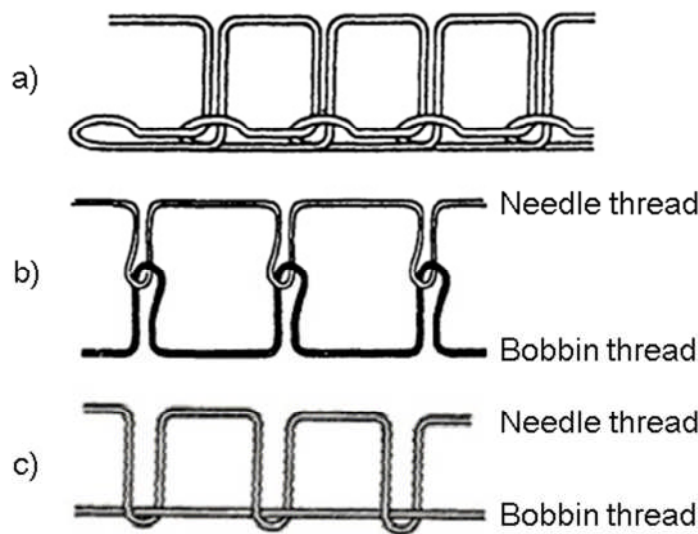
Schematic of the stitching types: a) chain stitch, b) lock stitch, adapted from [84] and c) modified lock stitch, adapted from [82].
